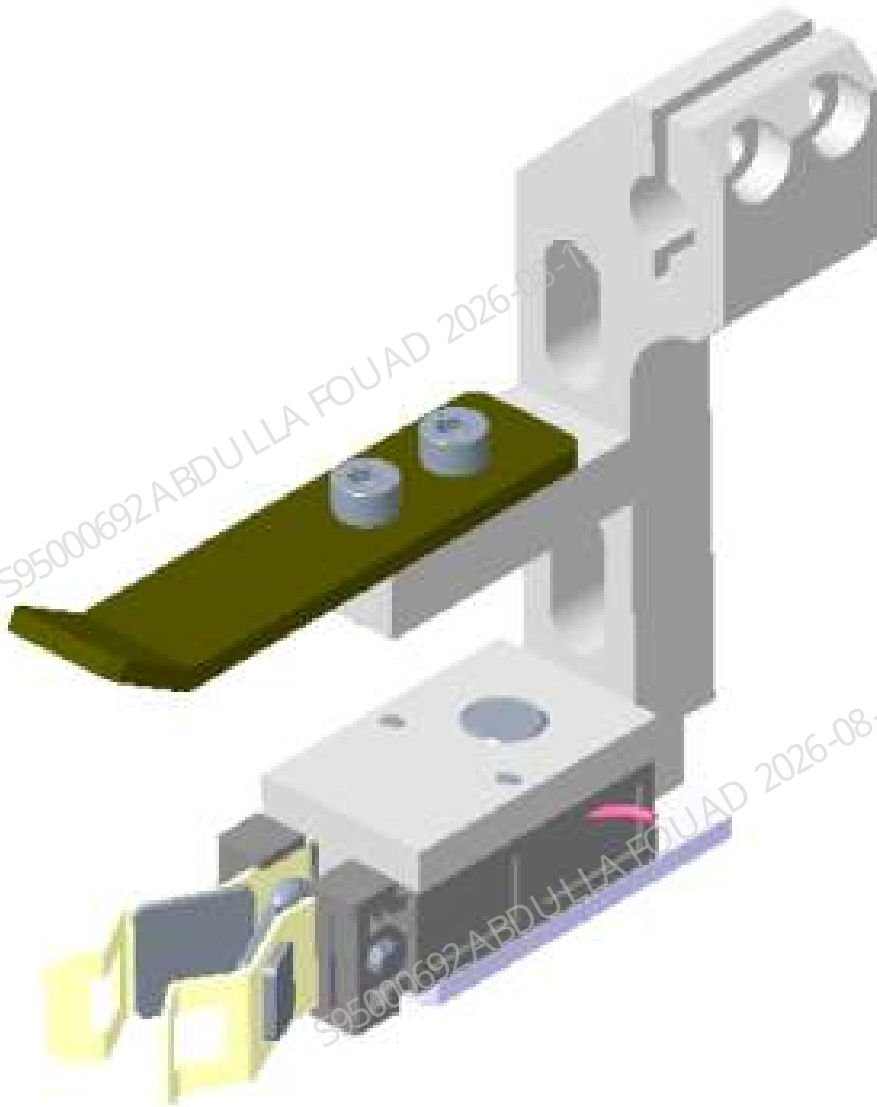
Diagram of Location of Tube Gripper in the Main Unit
